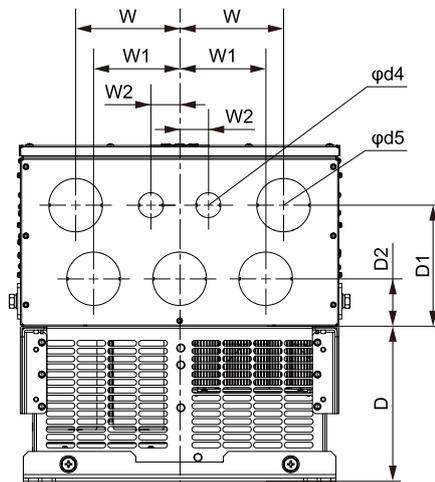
Exterior and Mounting Dimensions Diagram 9 (Models: 2360 and 4371)
